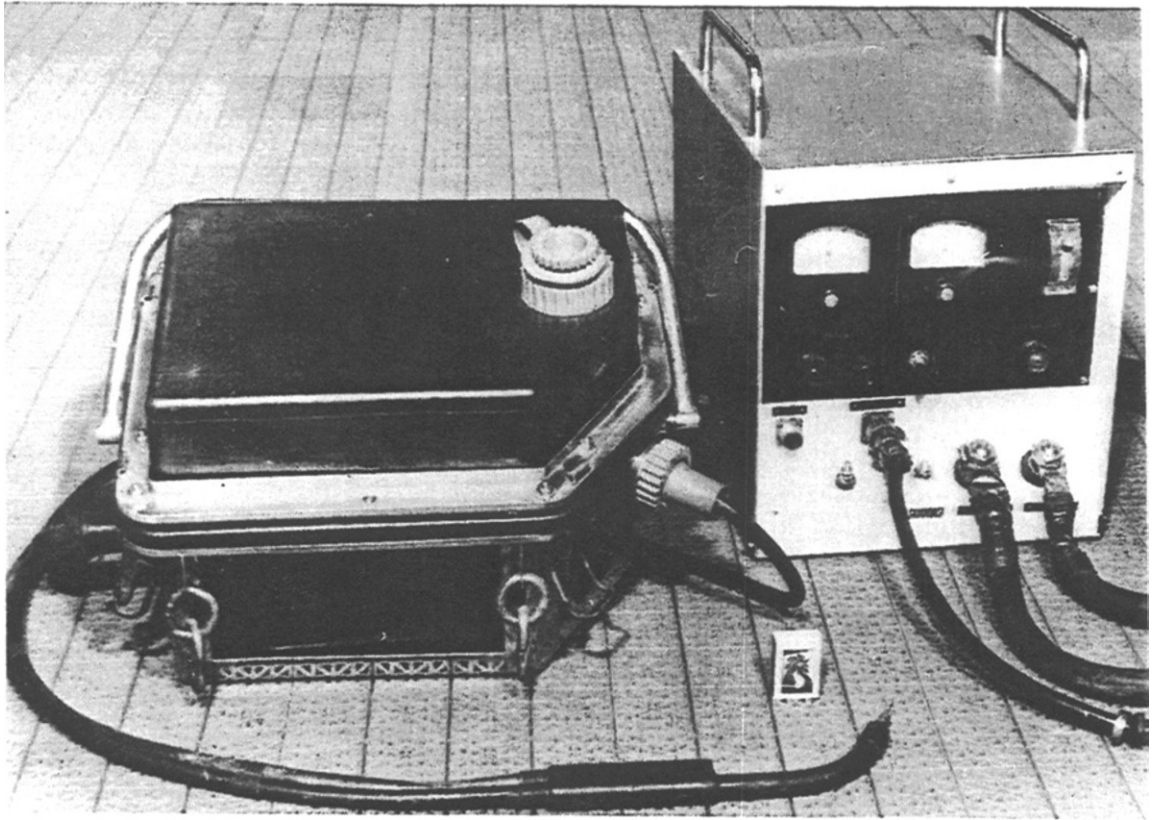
Semi-automatic machine for underwater arc welding.
